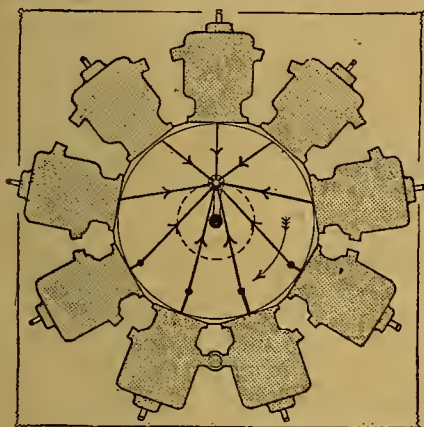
Angle at which power impulses impinge towards crank pin.
